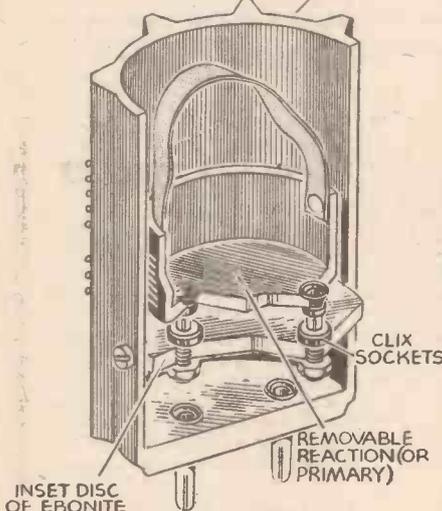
Suggestion for making one section of a S.W. coil on a removable former for experimental purposes.
